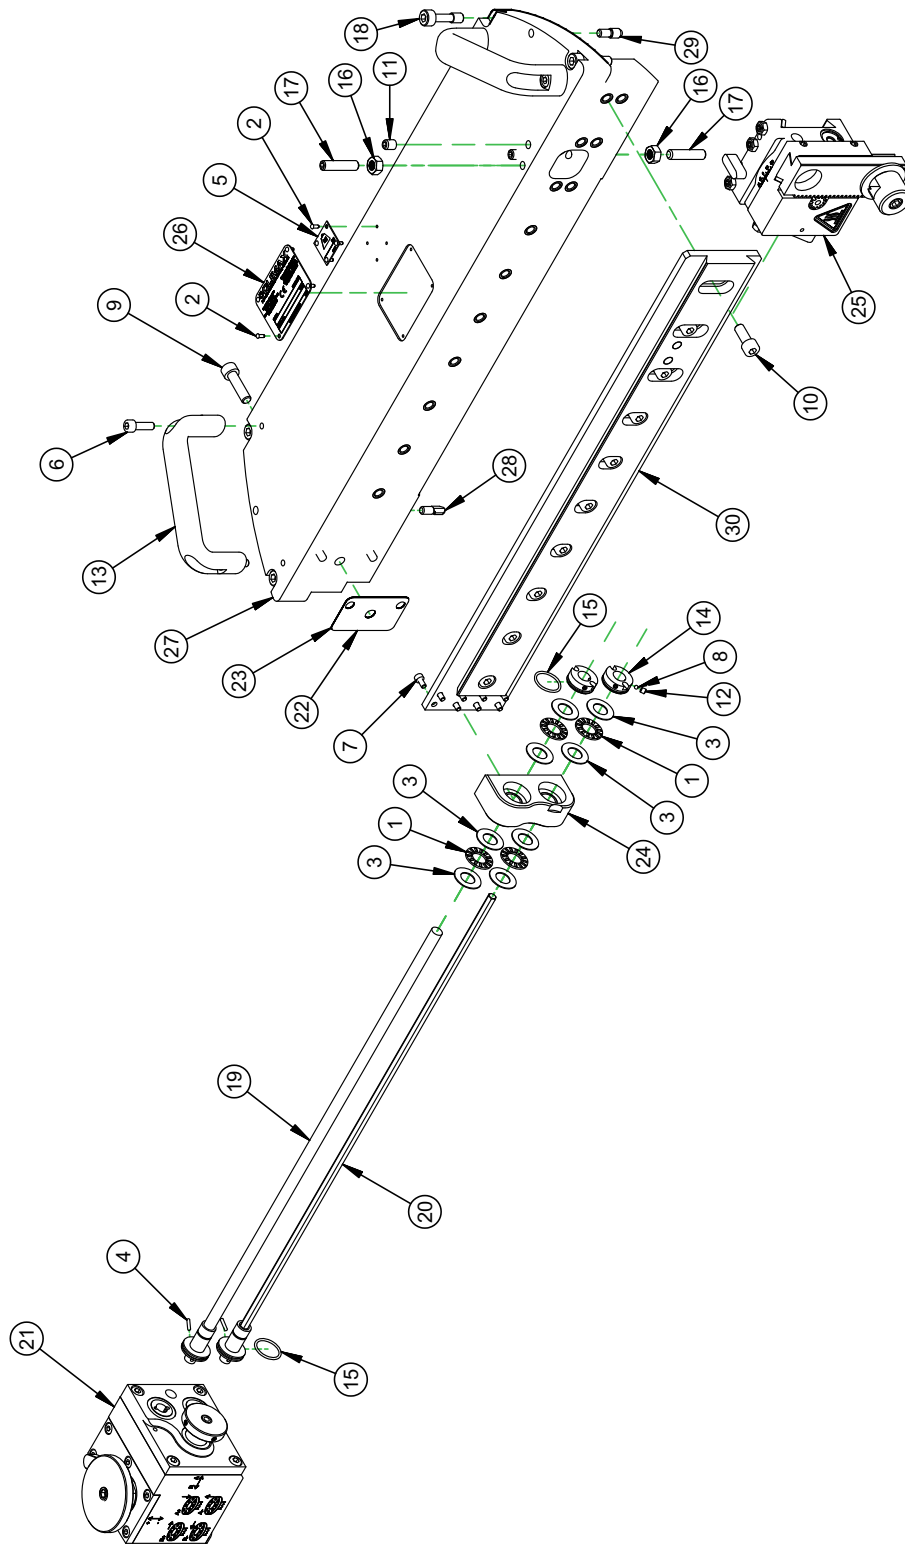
FF2400 RADIAL AND AXIAL SLIDE ASSEMBLY (P/N 80683)
